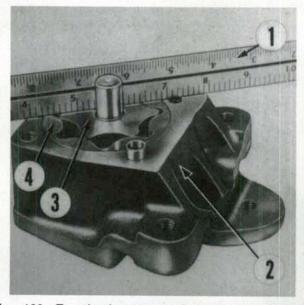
To check rotor end clearance, place a straightedge across pump housing and measure gap between straightedge and rotor.
